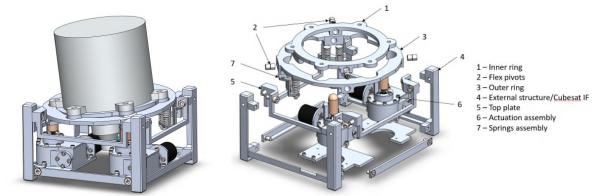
TPM assembly with Thruster (left)/ Exploded view of TPM with component list
